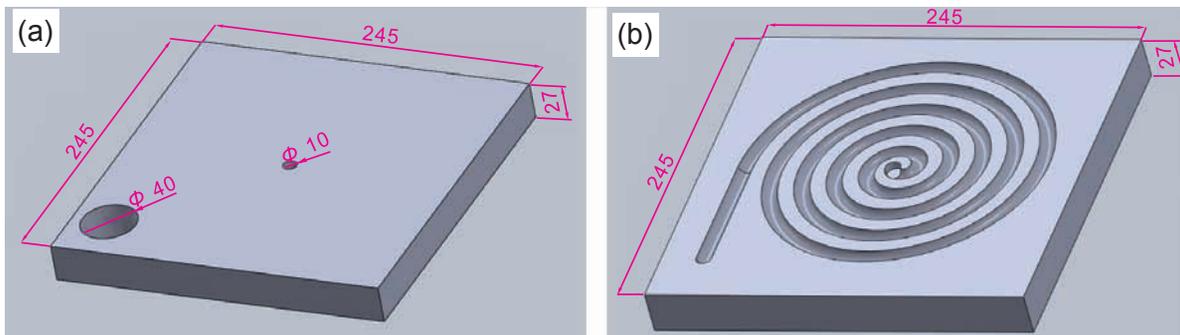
Universal spiral fluidity test mould: (a) upper mould; (b) lower mould (unit: mm)
